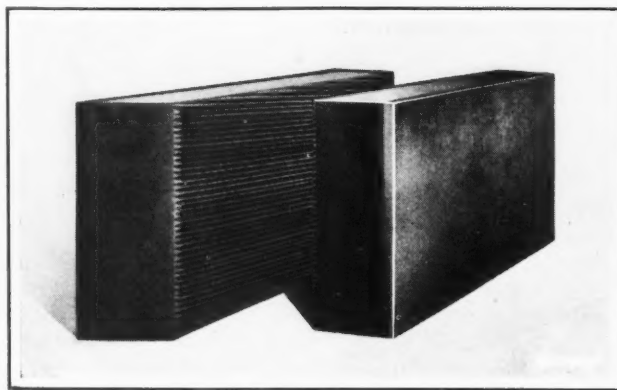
Pair of Dies used in rolling Threads on Bolts
